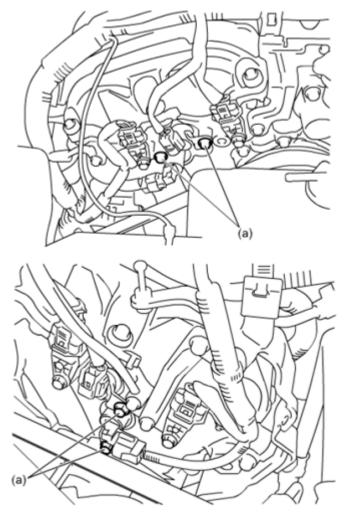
Identifying OCV Bolt Courtesy of SUZUKI OF AMERICA CORP.
